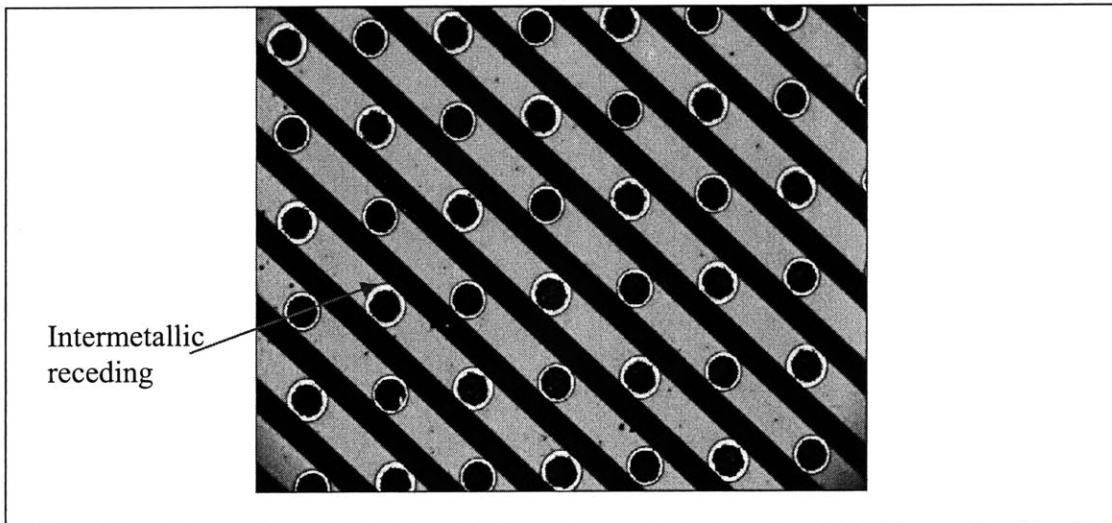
Intermetallic receding after 15 minutes in solder bath at 70°C
